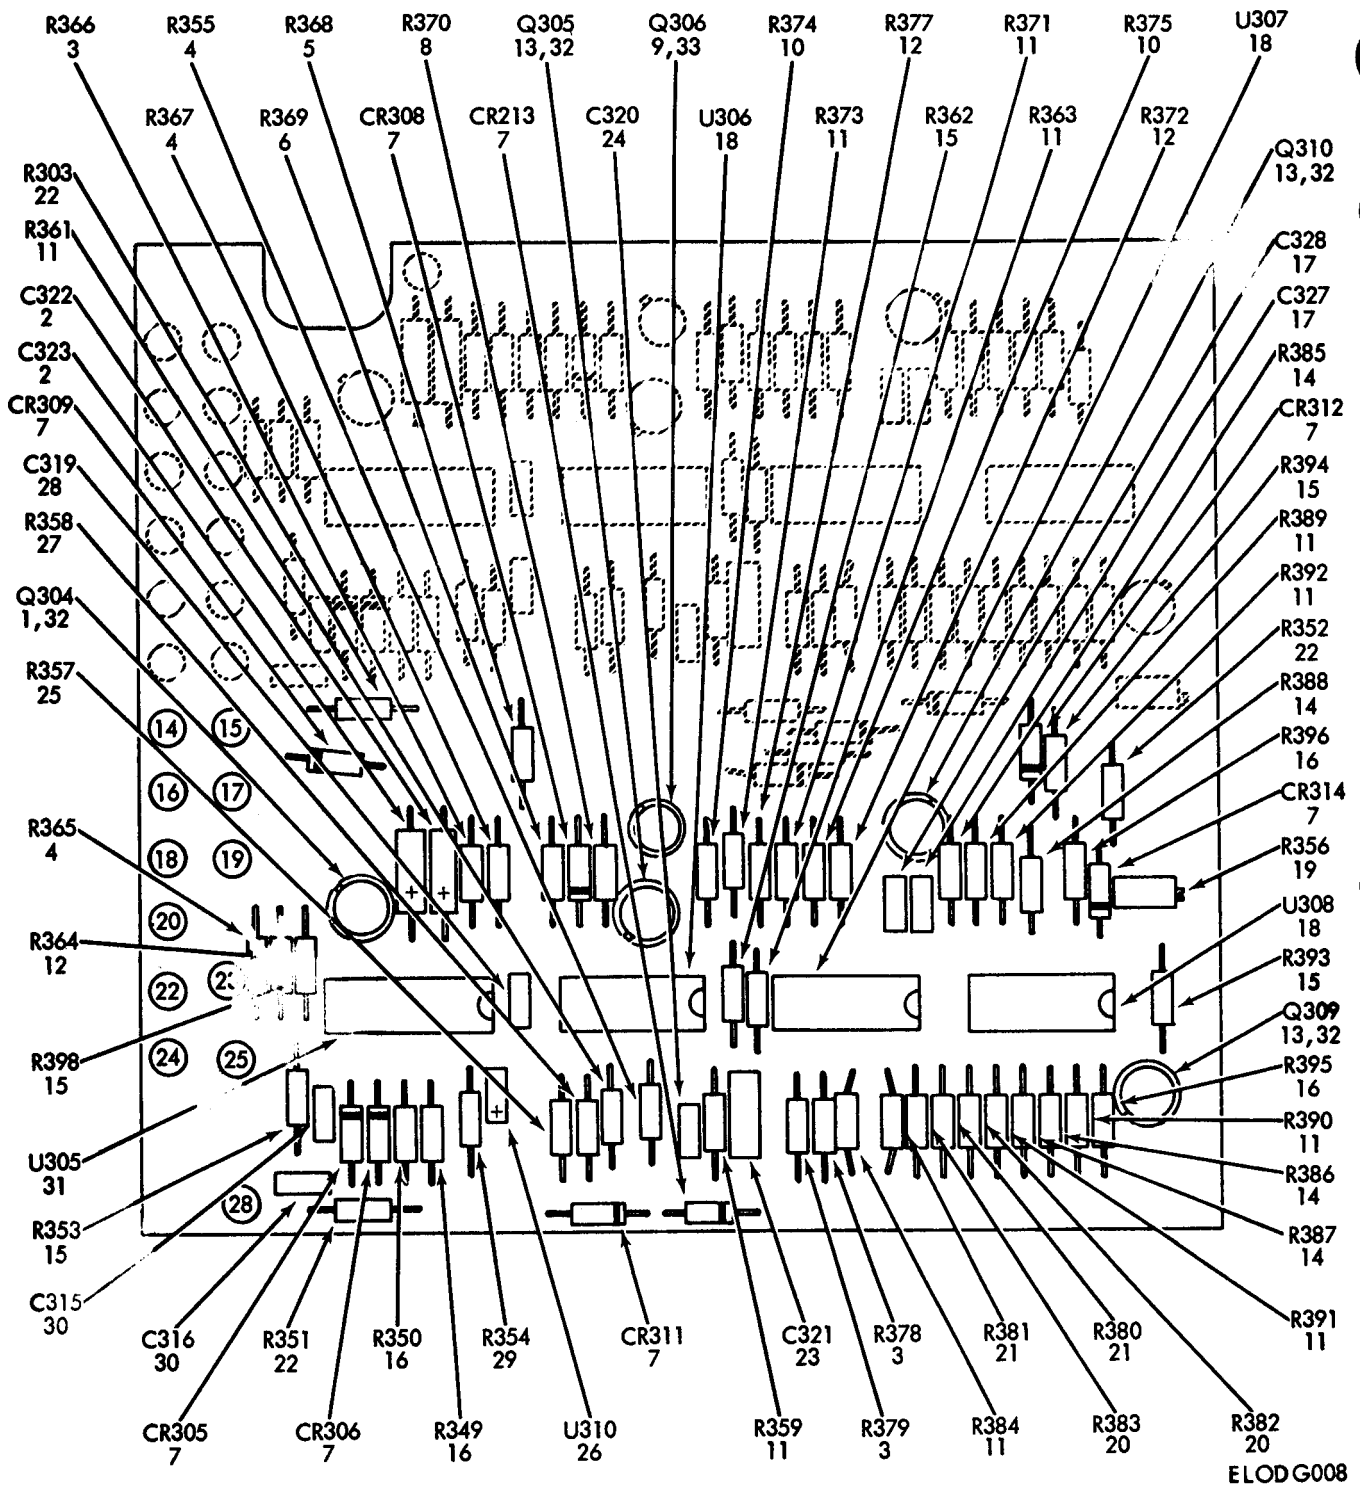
① Printed circuit board assembly, 0B and 0C (sheet 1 of 2).
